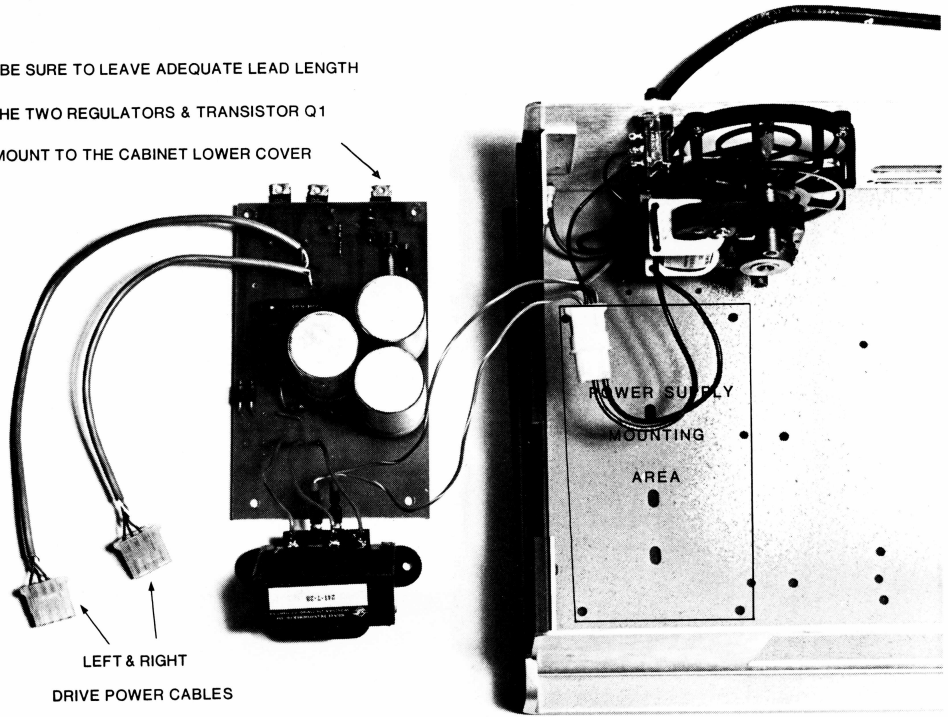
MINI-FLOPPY AC WIRING & POWER SUPPLY MOUNTING
